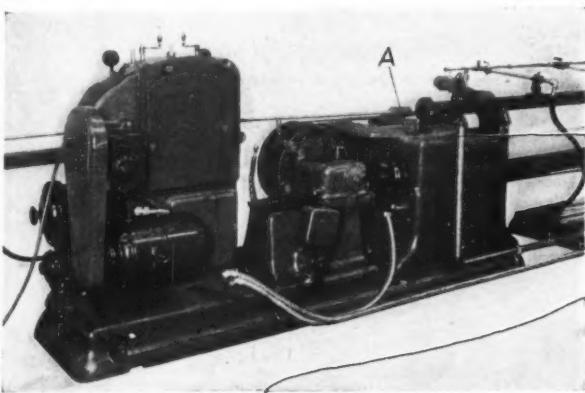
An expandible head exerts pressure against an endless abrasive belt to grind tubes internally
